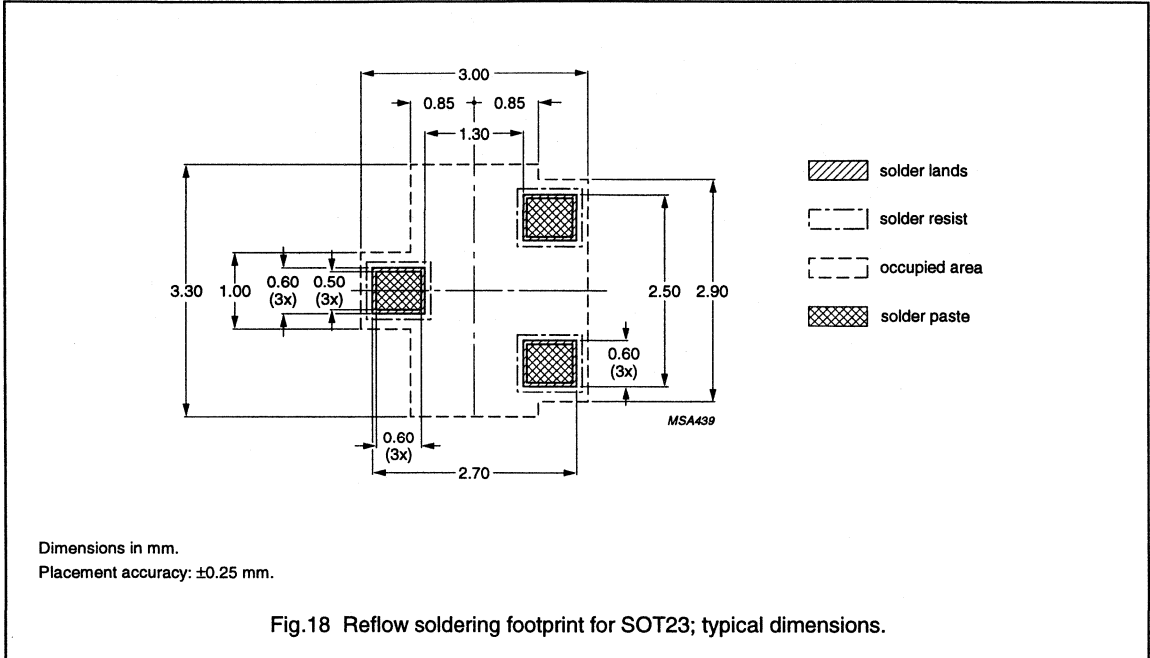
Reflow soldering footprint for SOT23; typical dimensions.
